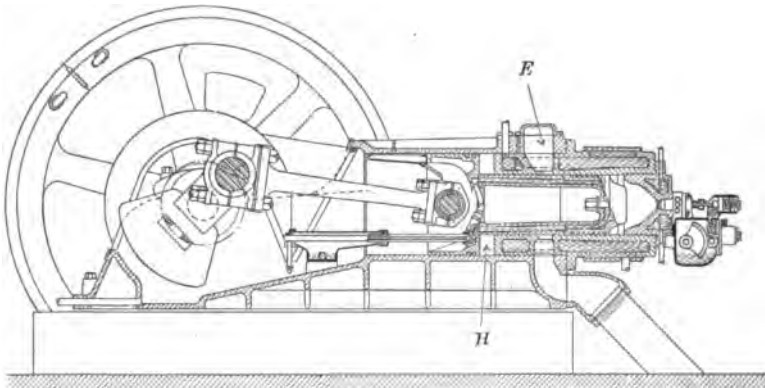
Longitudinal section through working cylinder. Standard Fuel Oil engine.
